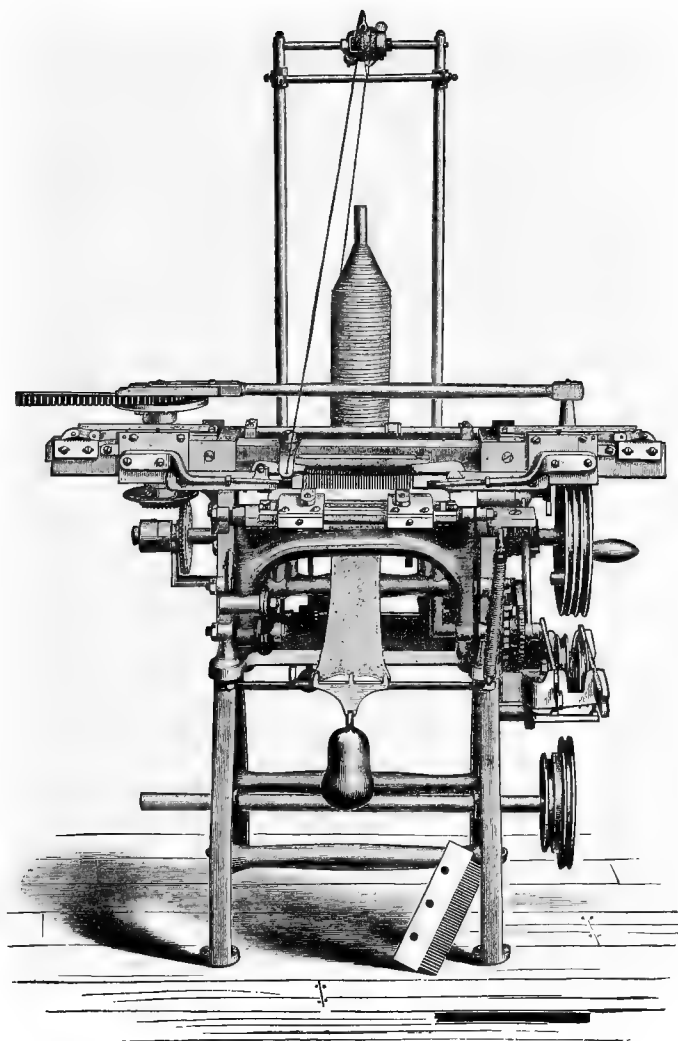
The Abel Machine Company's full-fashioned legger.
